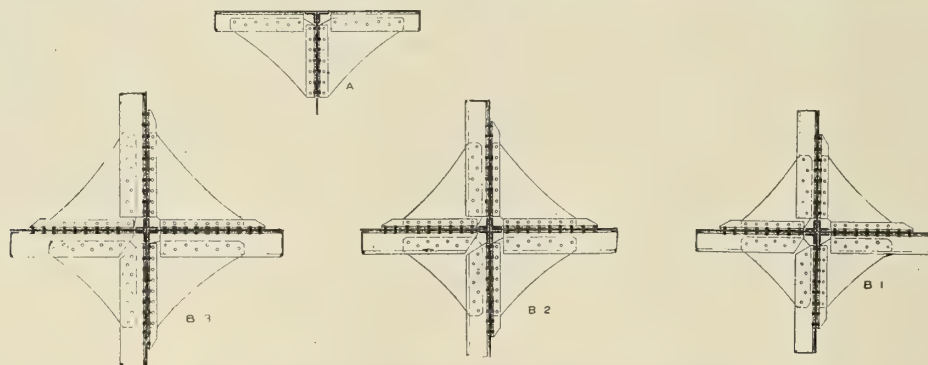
DETAILS OF CONNECTION TO STRINGERS AND BULKHEADS.
